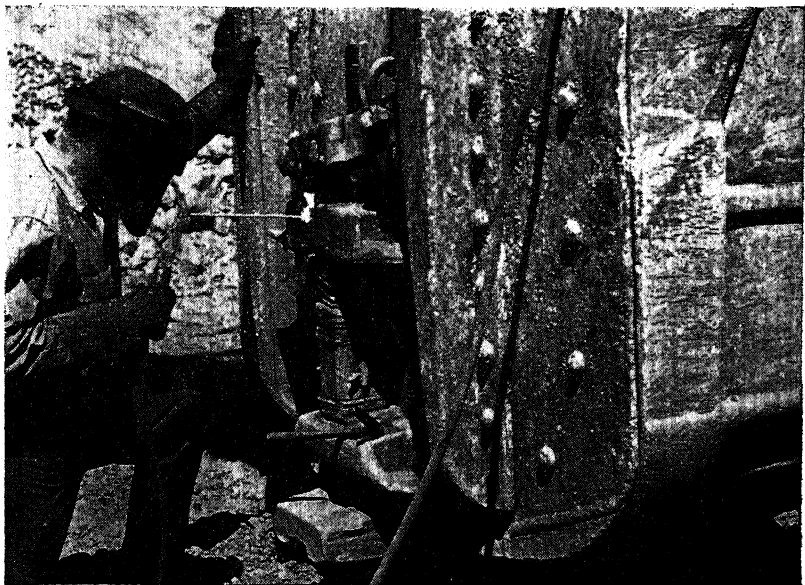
Repairing a broken trip on a five-yard shovel bucket with shielded arc mild steel electrode. Note also welded repair in lip of bucket.
